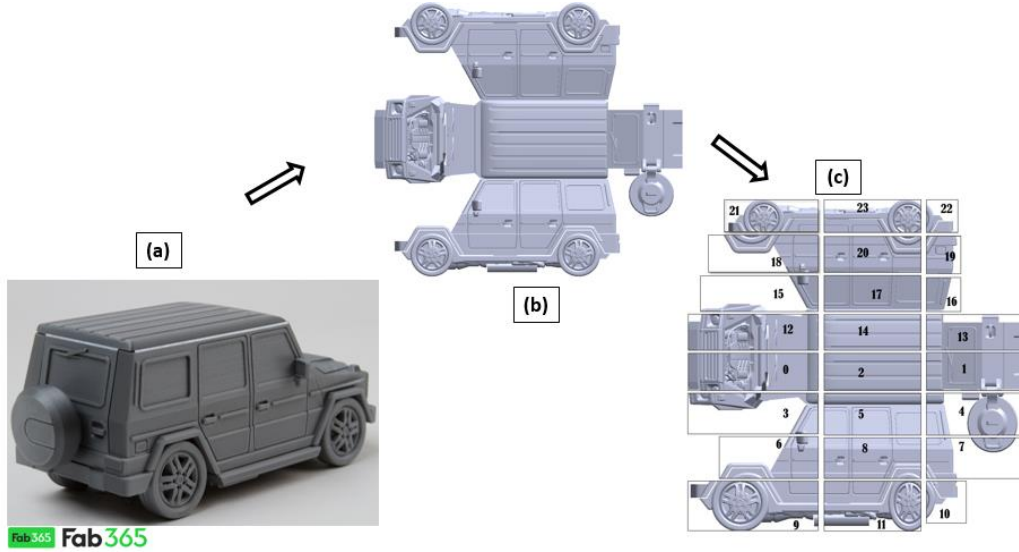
(a) Folded 3D model of a printed SUV vehicle (b) Top view of unfolded STL model of a SUV vehicle (c) Rectangular block showing the chunks line, exploded view of the chunks that combine to make a rectangular block and top view of exploded chunks [7]
